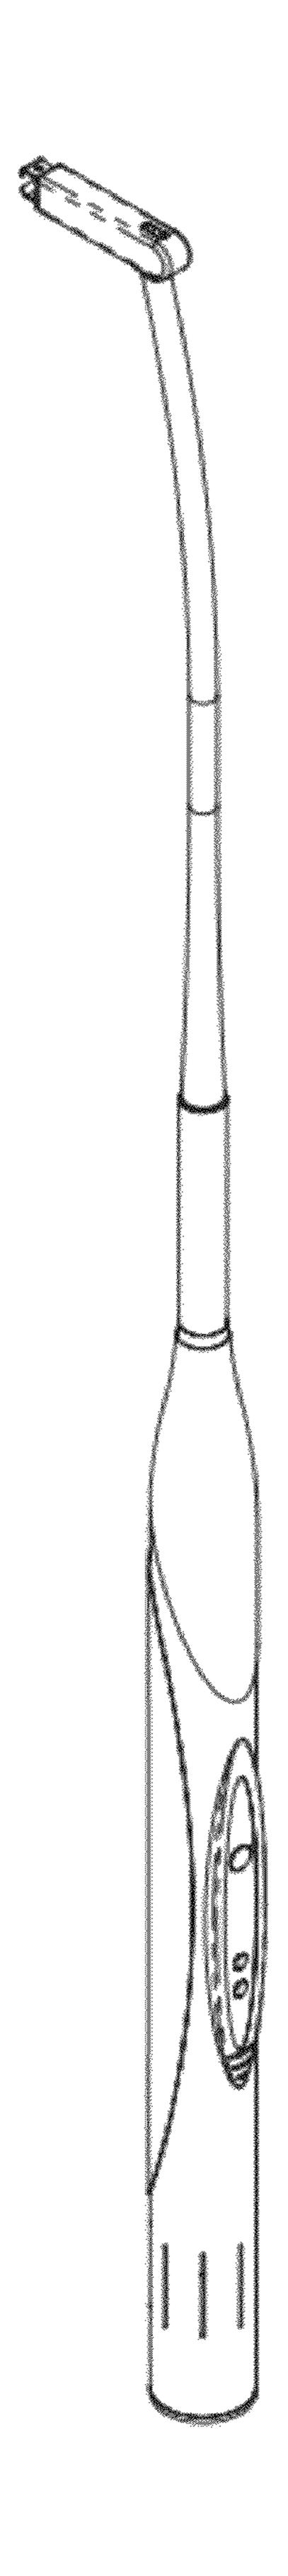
is a bottom perspective view showing the area upon a close-up is taken and shown in FIG. 11; and,
